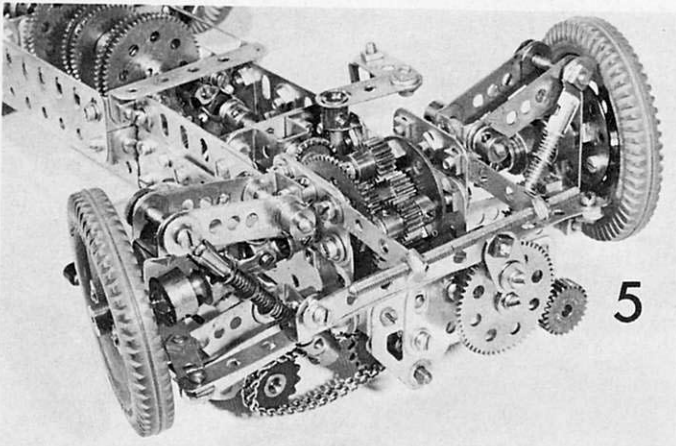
Front axle unit in close-up, showing spring loaded suspension struts and track rod drive arrangements for steering gear.
